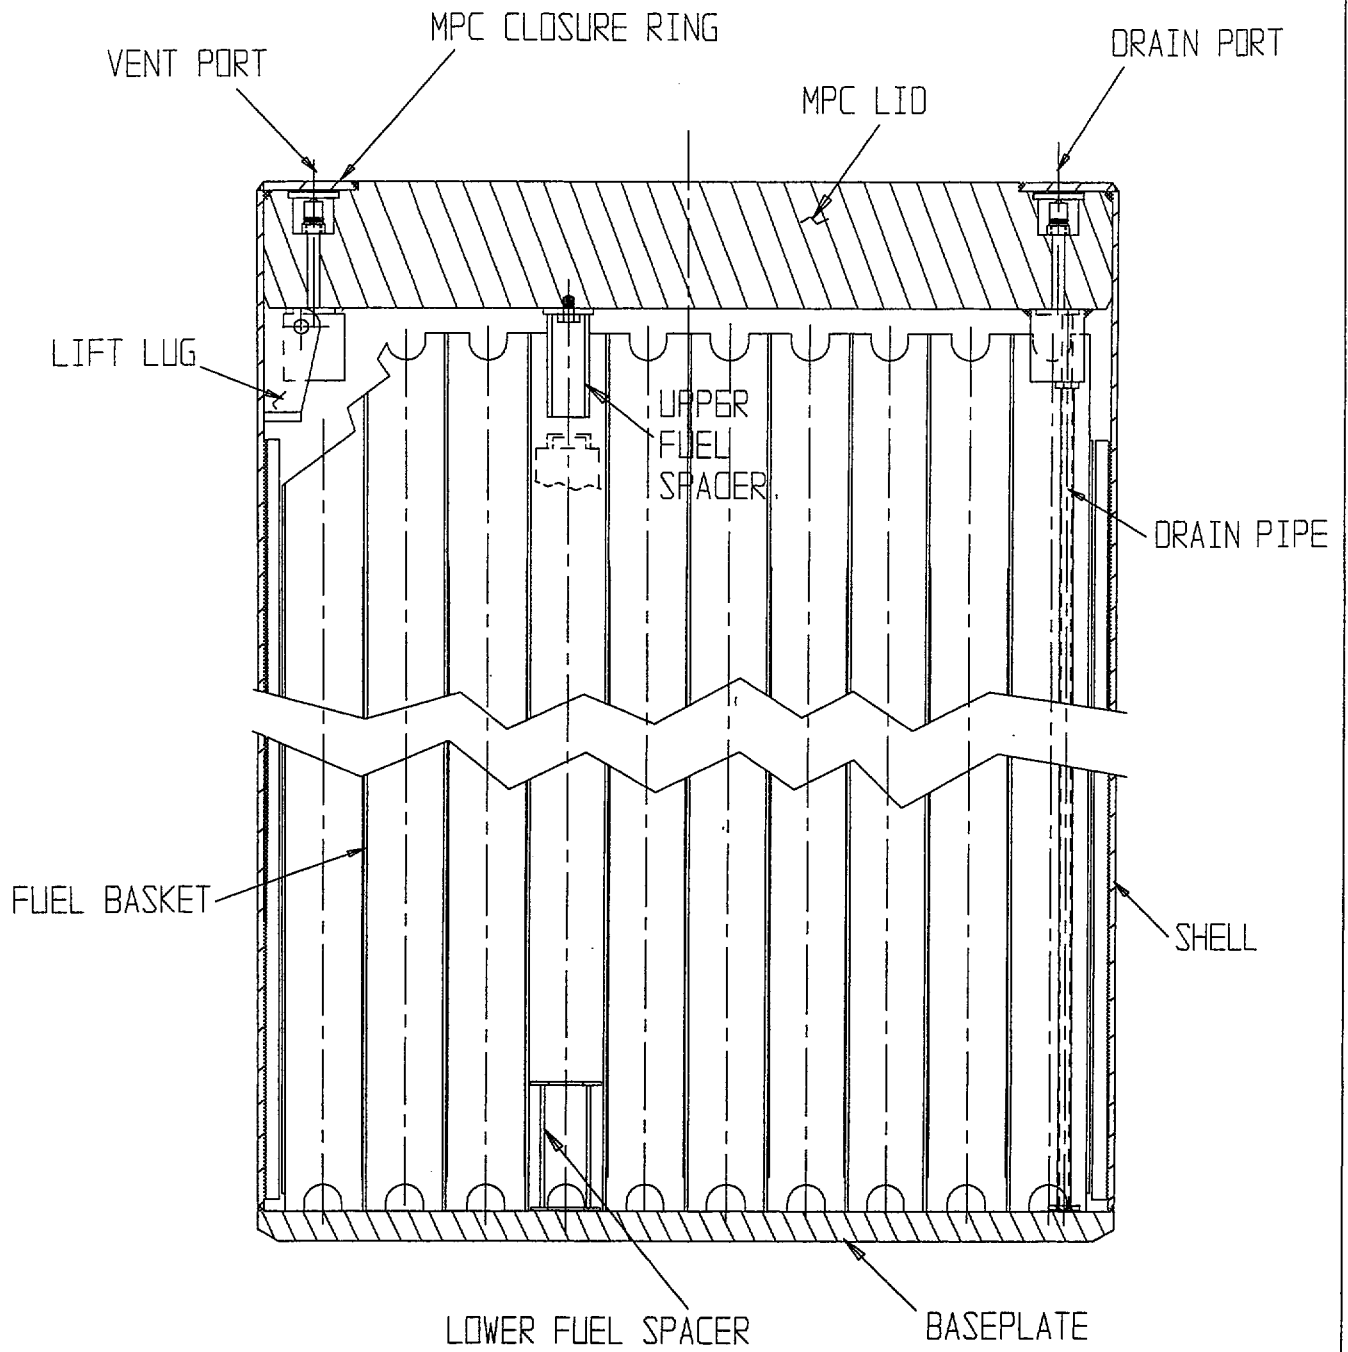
; CROSS SECTION ELEVATION VIEW OF MPC
